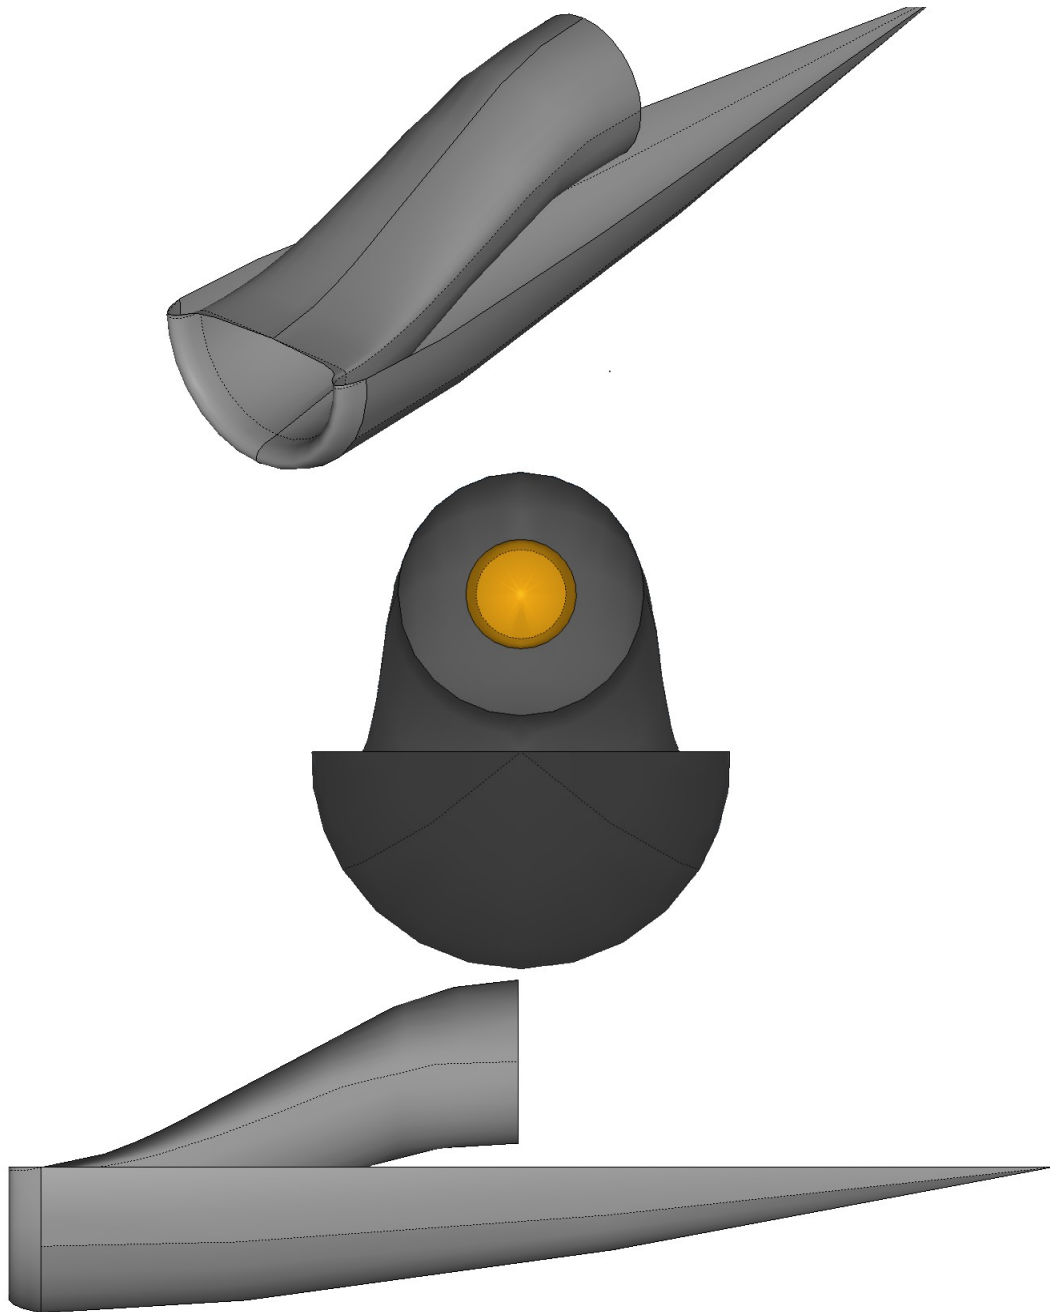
3D image, rear and right views of the S-X02 inlet without the drive shaft.
